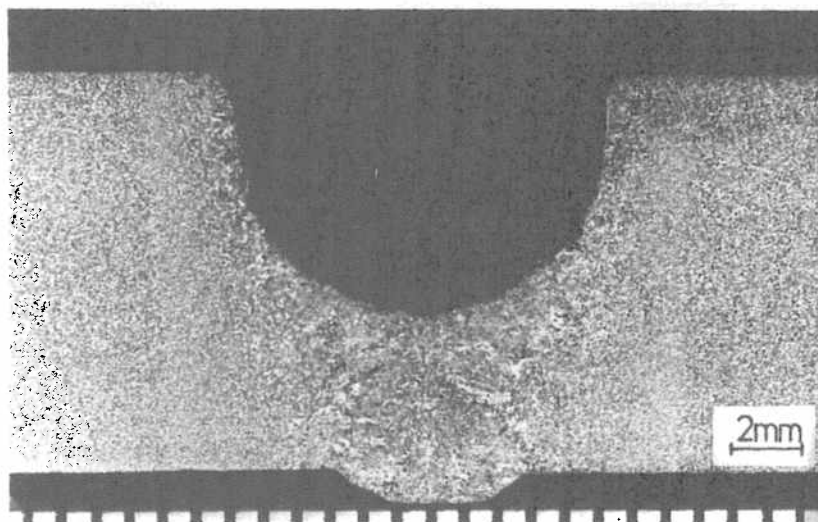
Root welding of unalloyed structural steel (Fe 37B) with a single U-groove and plate thickness of 12 mm. Root face 4 mm and root radius 5 mm. Plasma gas SH5 (3,0 l/min), shielding gas argon (15 l/min) and backing gas argon (5 l/min). Welding current 300 A and welding speed 18 cm/min. One-hole nozzle, diameter 3,5mm.
